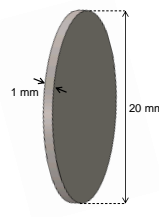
a: Design drawing of the front plate of the mini-container for the nanotubes samples with dimensions in millimeters.
